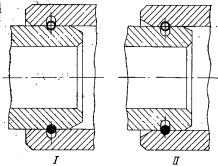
Locking concentric parts by spring rings. The ring is placed in hub groove (I) or in shaft groove (II)
